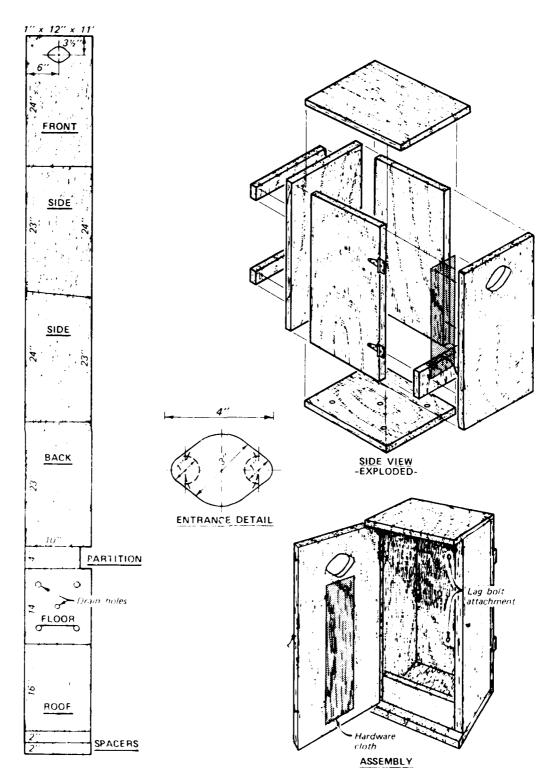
Construction details for a front-opening wooden nest box (entrance detail from Bellrose 1980)
